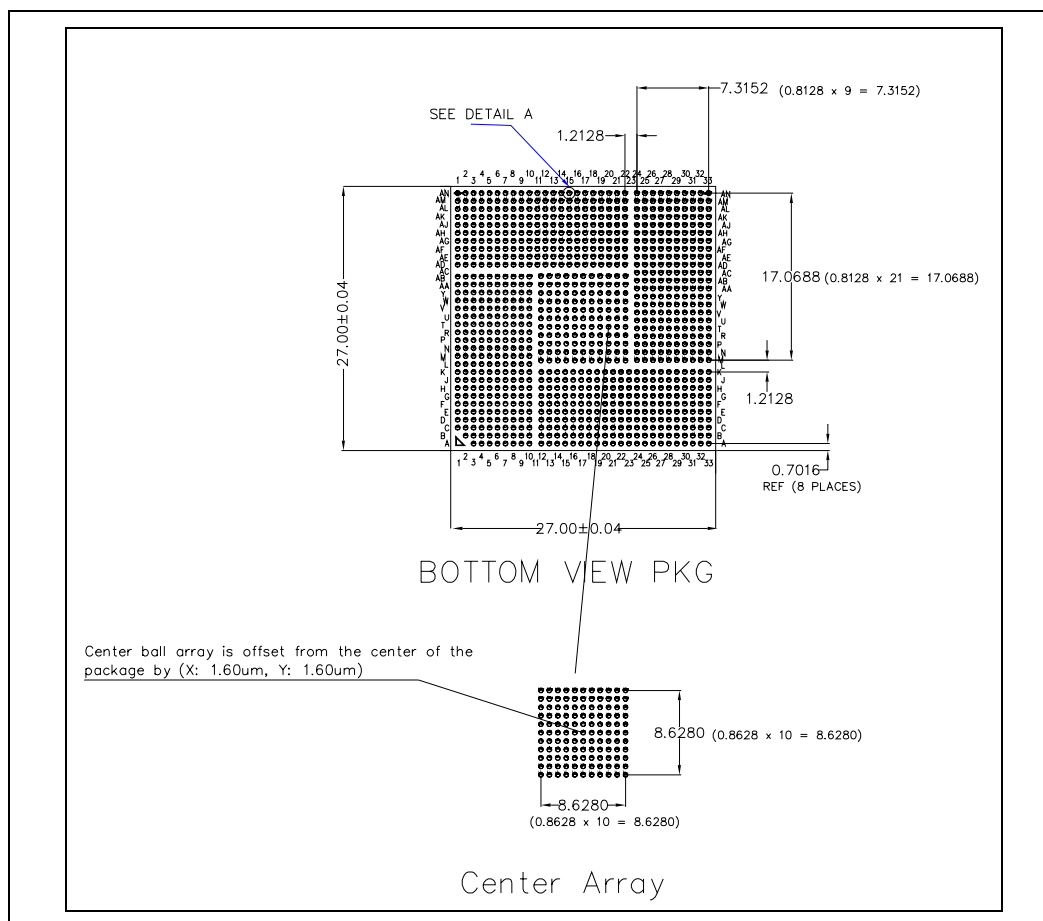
Mobile Intel 945GMS Express Chipset Package FCBGA (Bottom View)
